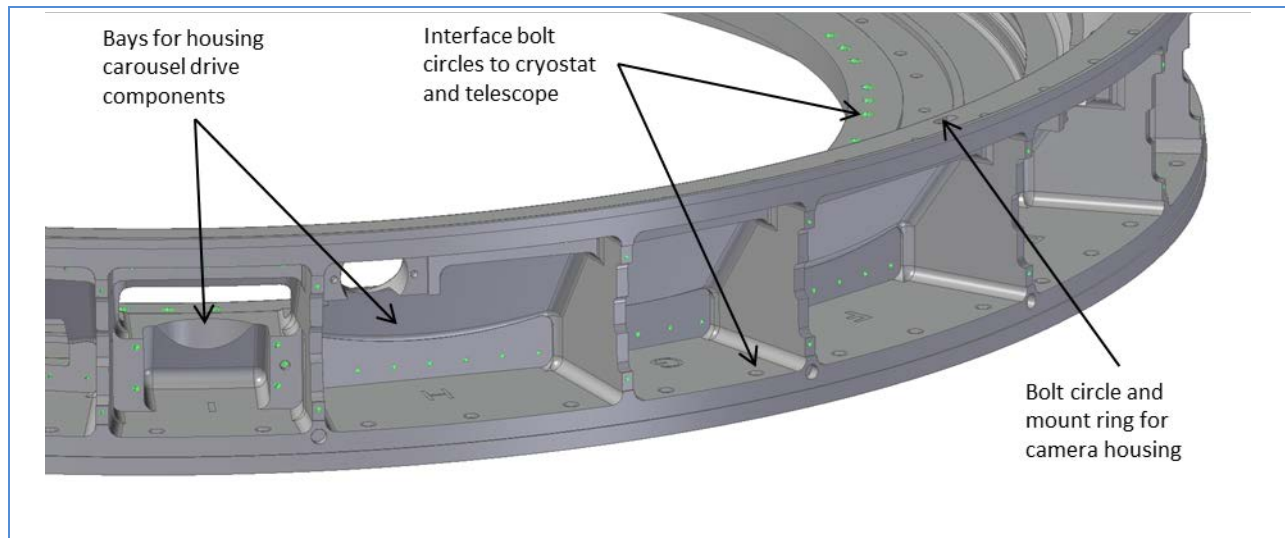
Back flange detail showing interfaces and bay mounting features for components
